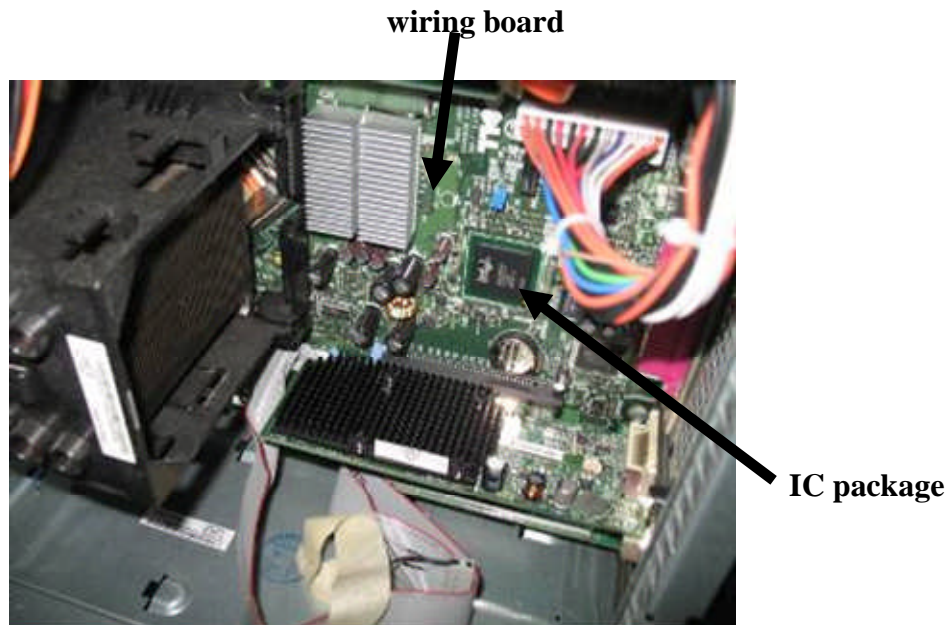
Desktop personal computer showing an IC package attached to a printed wiring board (PWB)
